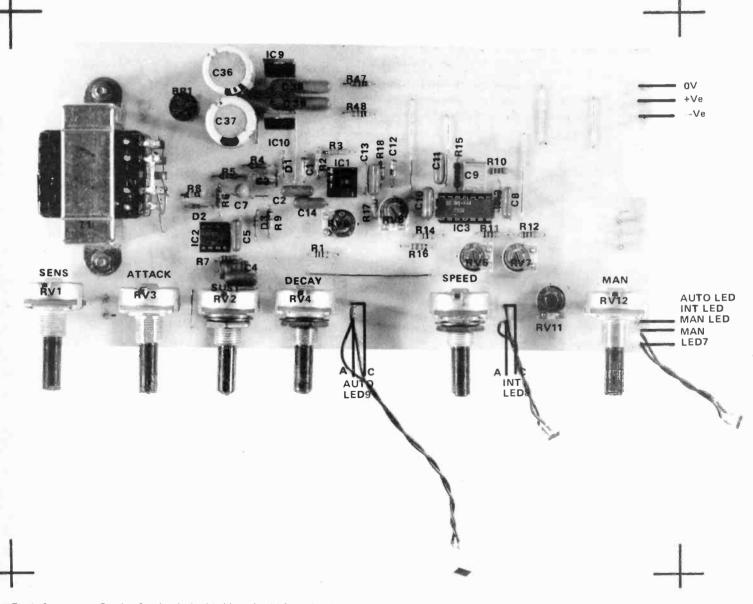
Component Overlay for the single sided board, which carries the power supply.
